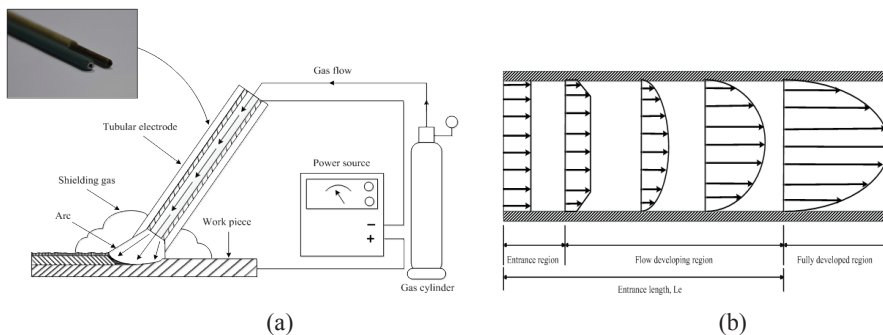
(a) Tubular welding technique and (b) internal flow characteristic in the tube
